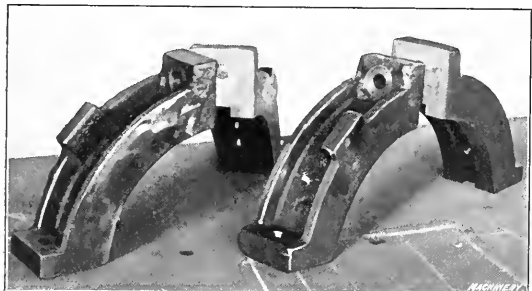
Four-part Clamp with electrically welded Bolt Lugs
